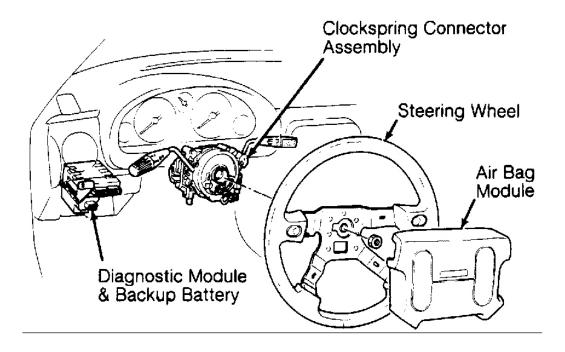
Identifying Air Bag System Components (Miata) Courtesy of MAZDA MOTORS CORP.
